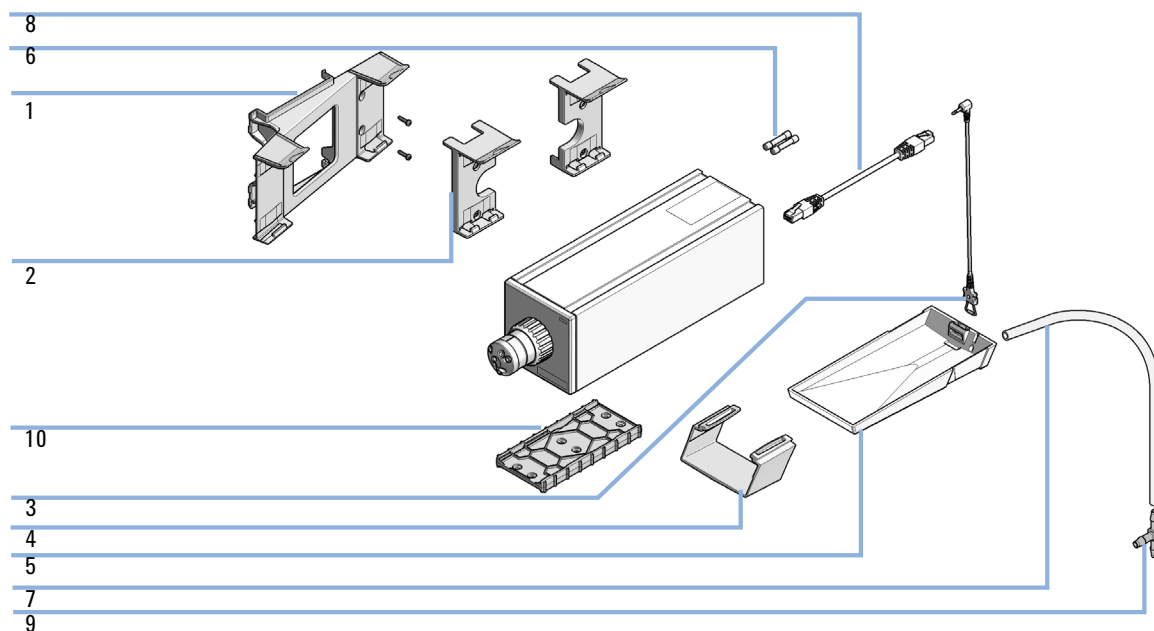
Parts for 1260/1290 Infinity II Valve Drive
